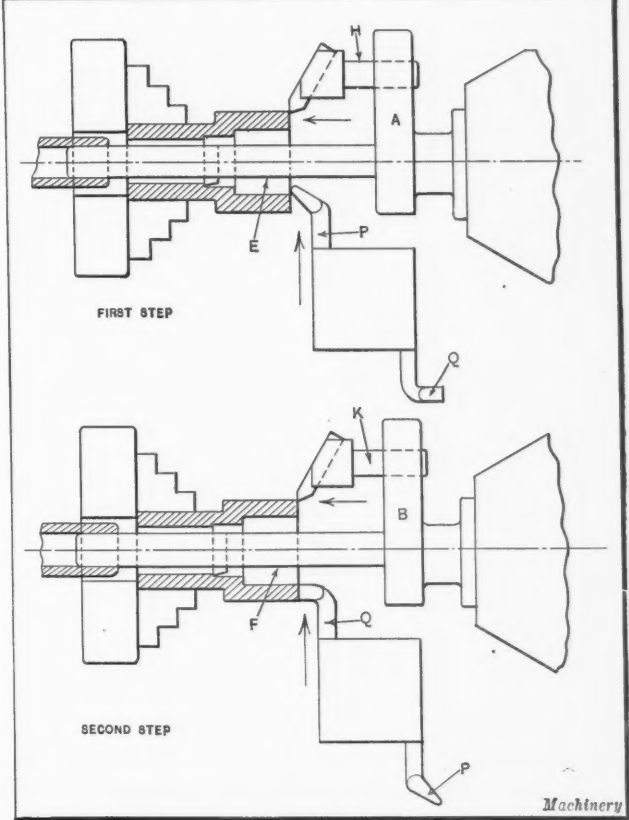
Preliminary Steps on a Steel Billet, in which the Piece is rough- and finish-turned, faced, and bored
